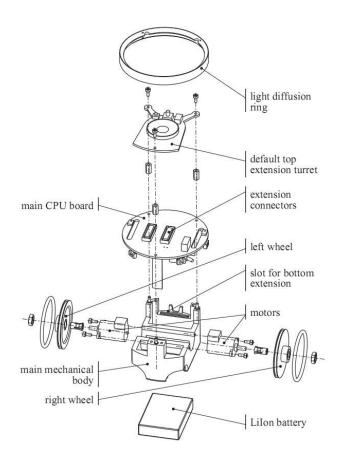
/ The mechanical structure of the e-puck in an exploded view [13].
